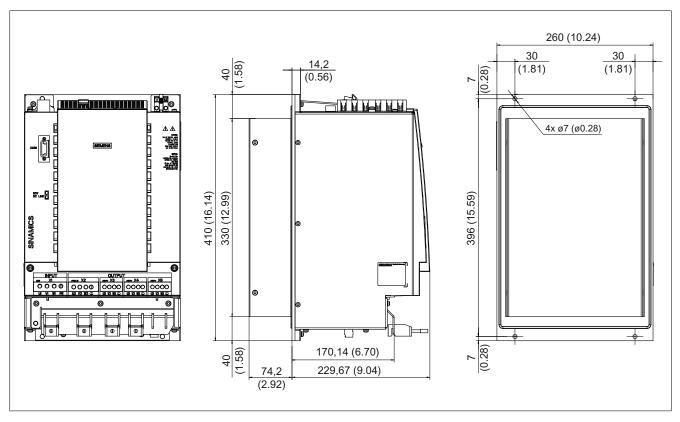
Dimension drawing of the S120 Combi 3 axes Power Module, all dimensions in mm and (inches)
